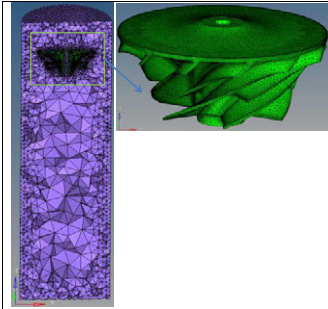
The mesh for a cylindrical extrusion billet and a final machined compressor wheel
